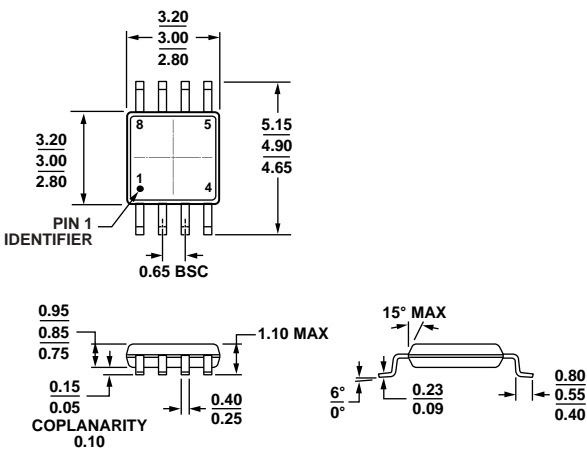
8-Lead Mini Small Outline Package [MSOP]
